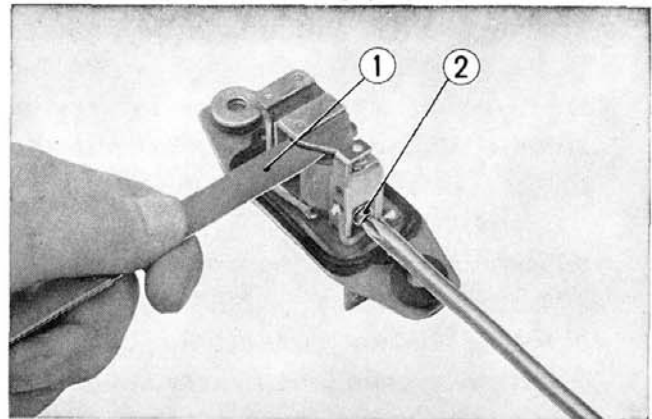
① Thickness gauge ② Core gap adjusting screw
